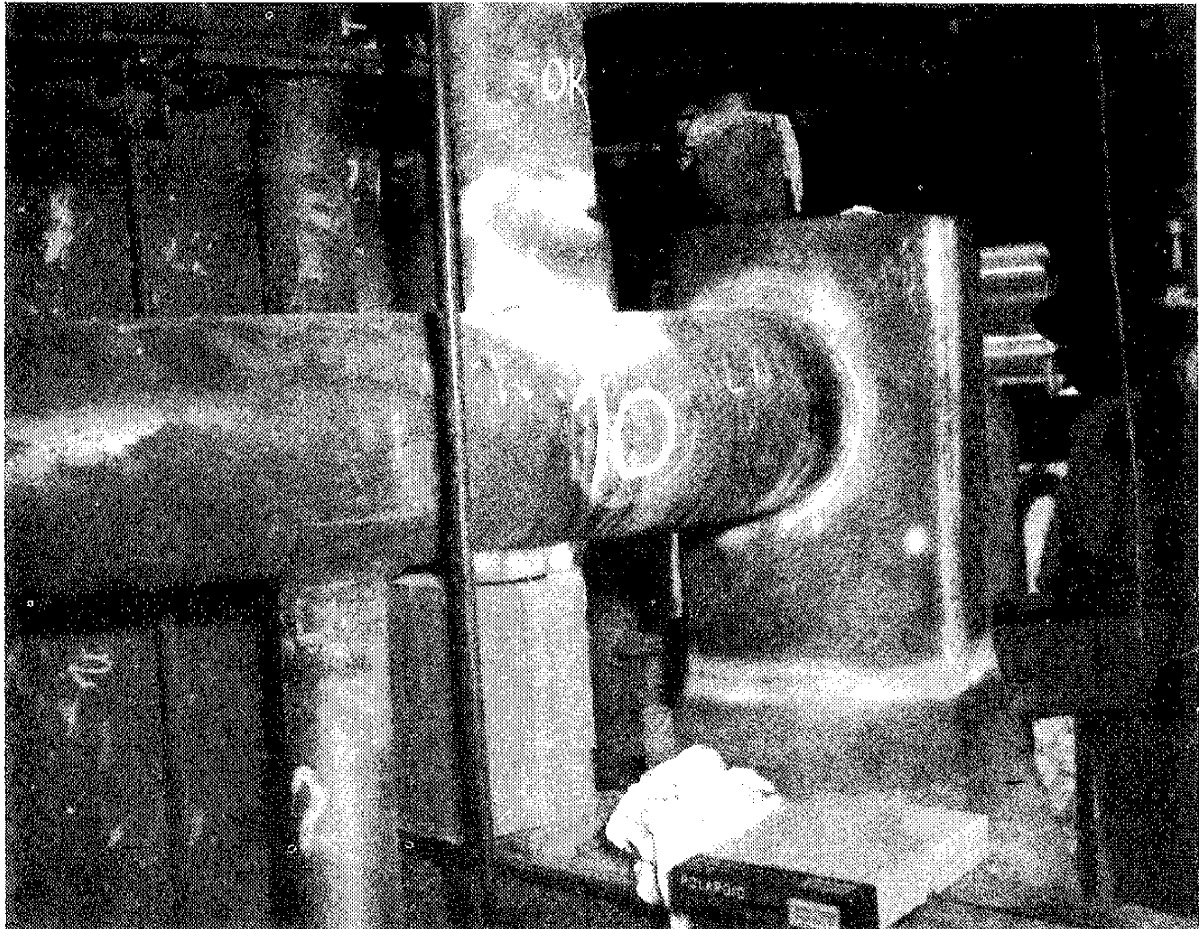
Example of cracking in nozzle welds in Incoloy ring header.
